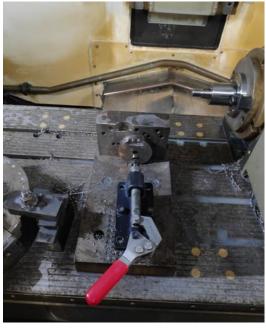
Complete Assembly of Toggle Clamp with Fixture Bed
